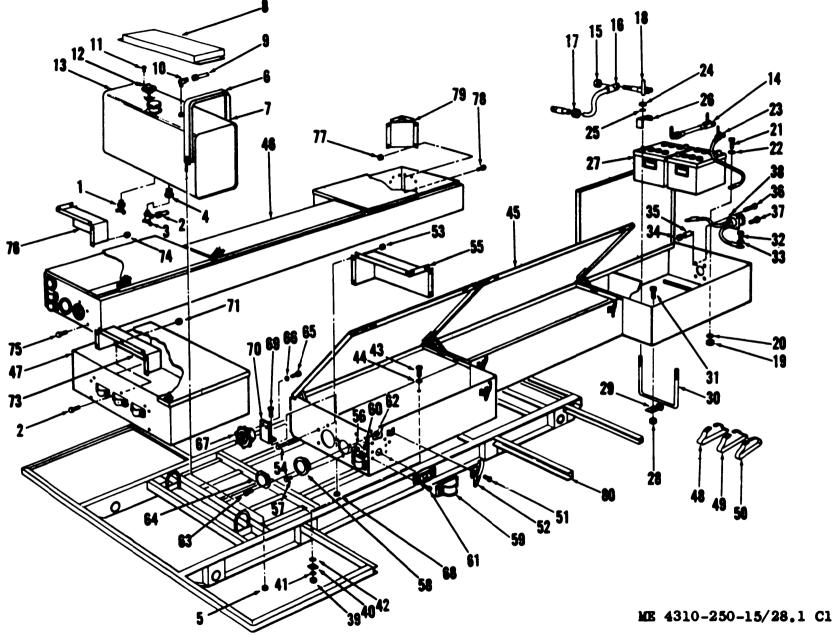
Tool boxes and fuel tank, removal and installation, Model 6M250RPV.
